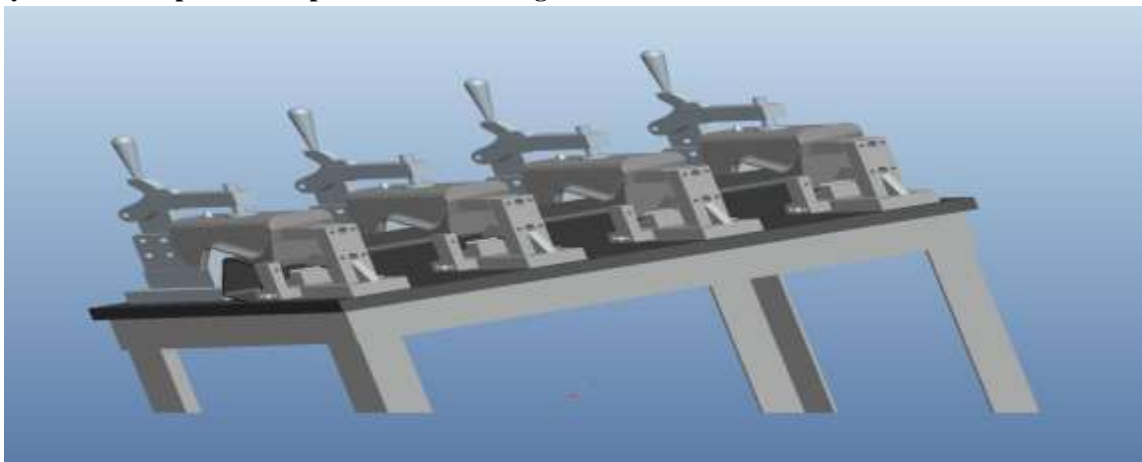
Assembly of Rack and pinion Component with Welding Fixture
